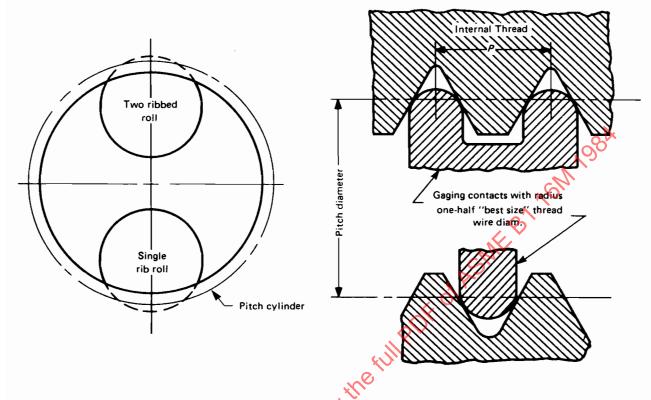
THREAD SNAP GAGES — MINIMUM-MATERIAL THREAD GROOVE DIAMETER LIMIT
